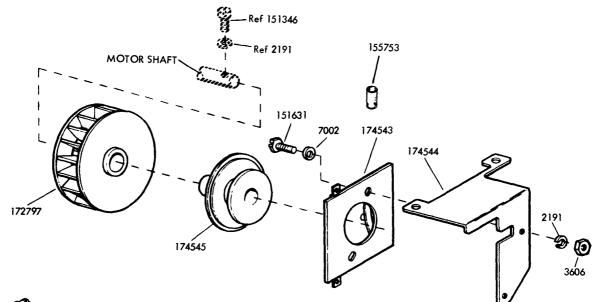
SERIES MOTOR MOUNTING PARTS WITH RF SUPPRESSION
